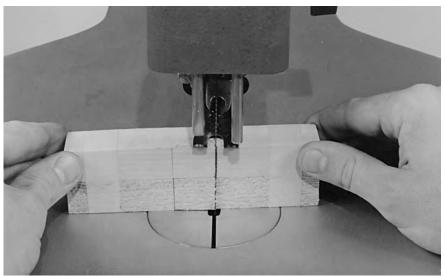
Tape scrap pieces of the background and inlay stock together. Make trial cuts until pieces fit correctly.
